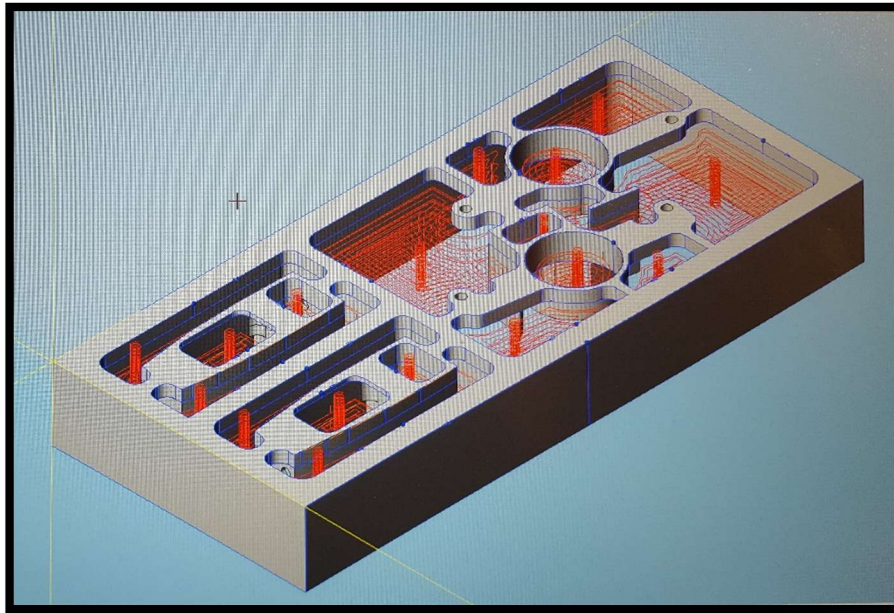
MACHINE TOOL PATH CREATED IN ESPRIT FOR THE MACHINED TAIL PIECES
